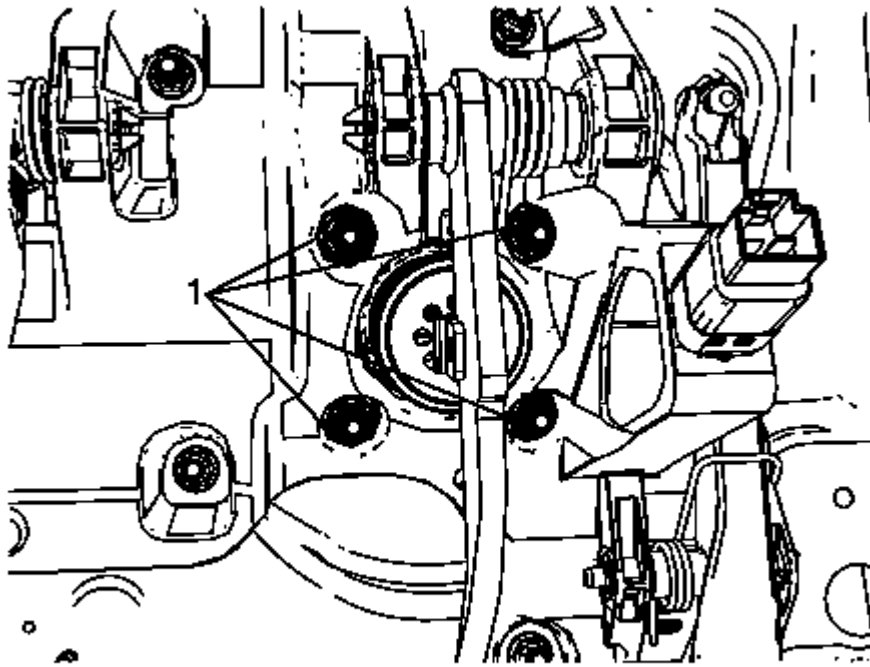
Clutch (ABC) Pedal Module Retaining Nuts
